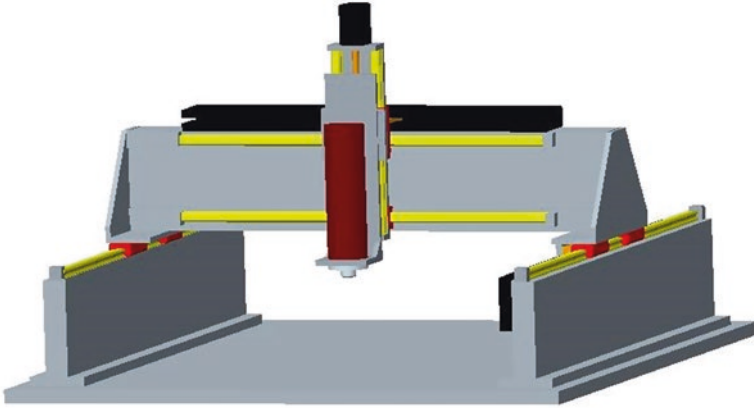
Tri-axis cnc milling machine LMG2A-CB6-CC8 [7]
